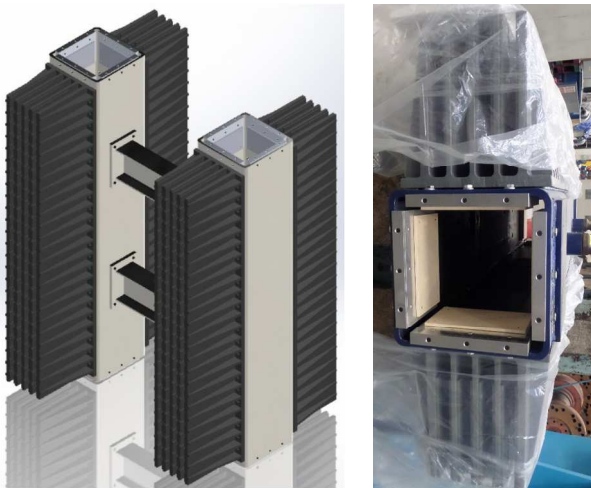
Translator construction. Left: CAD drawing of two translators joined together. Right: Fabricated single translator viewed from below indicating magnet modules and bearing pad assemblies
